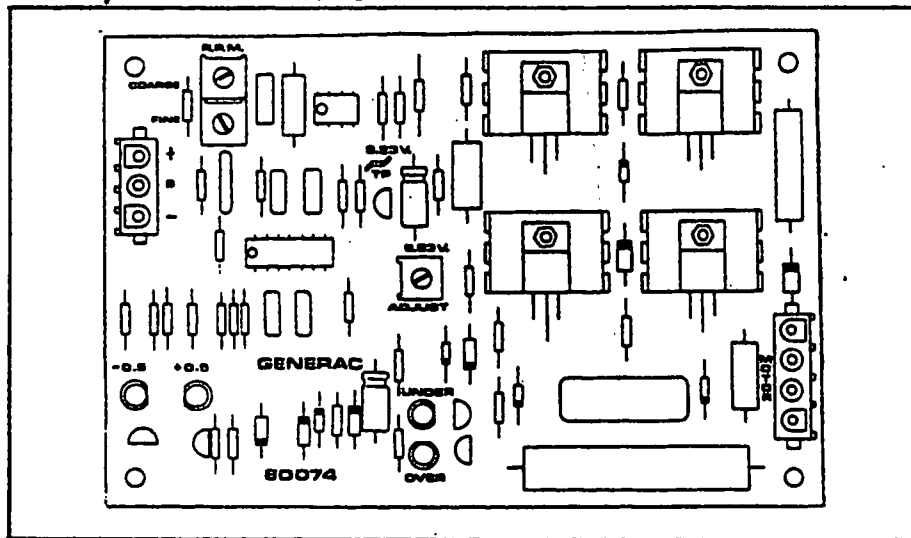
F. Throttle Positioner Printed Circuit Board
